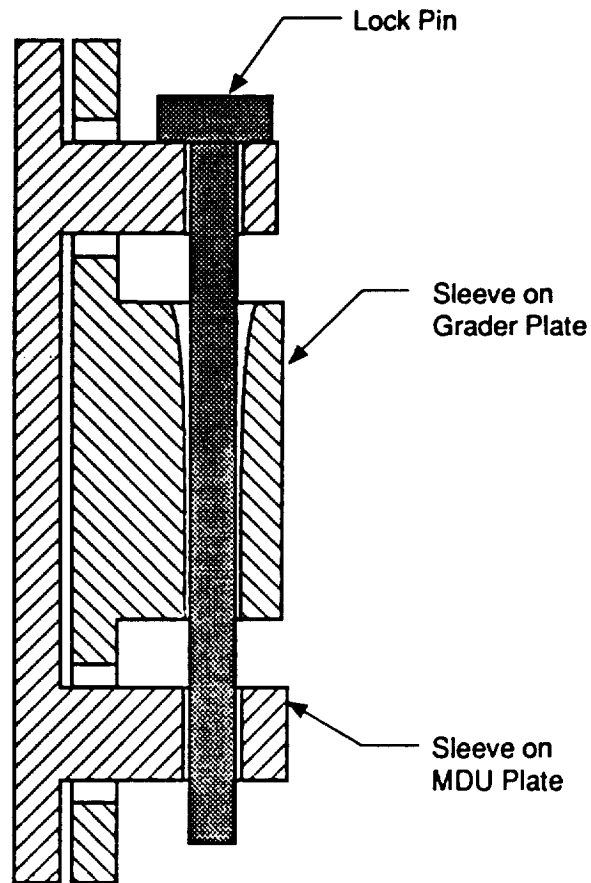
SECTION THROUGH GRADER ATTACHMENT MECHANISM
